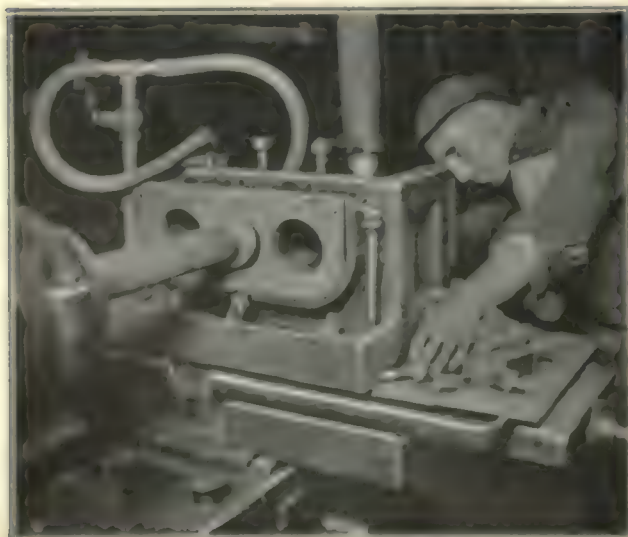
PROFILING BOTTOM OF CYLINDER. FIG. 2—THE FINISH-BORING. FIG. 3—CYLINDER GRINDING FIXTURE.
